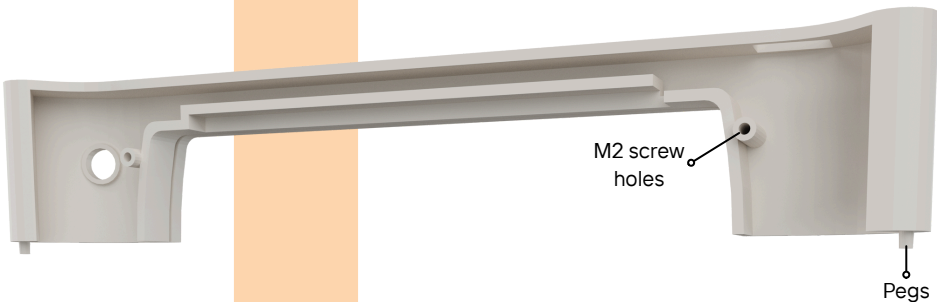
Goggles Top Half (Rear View) featuring peg and screw holes
